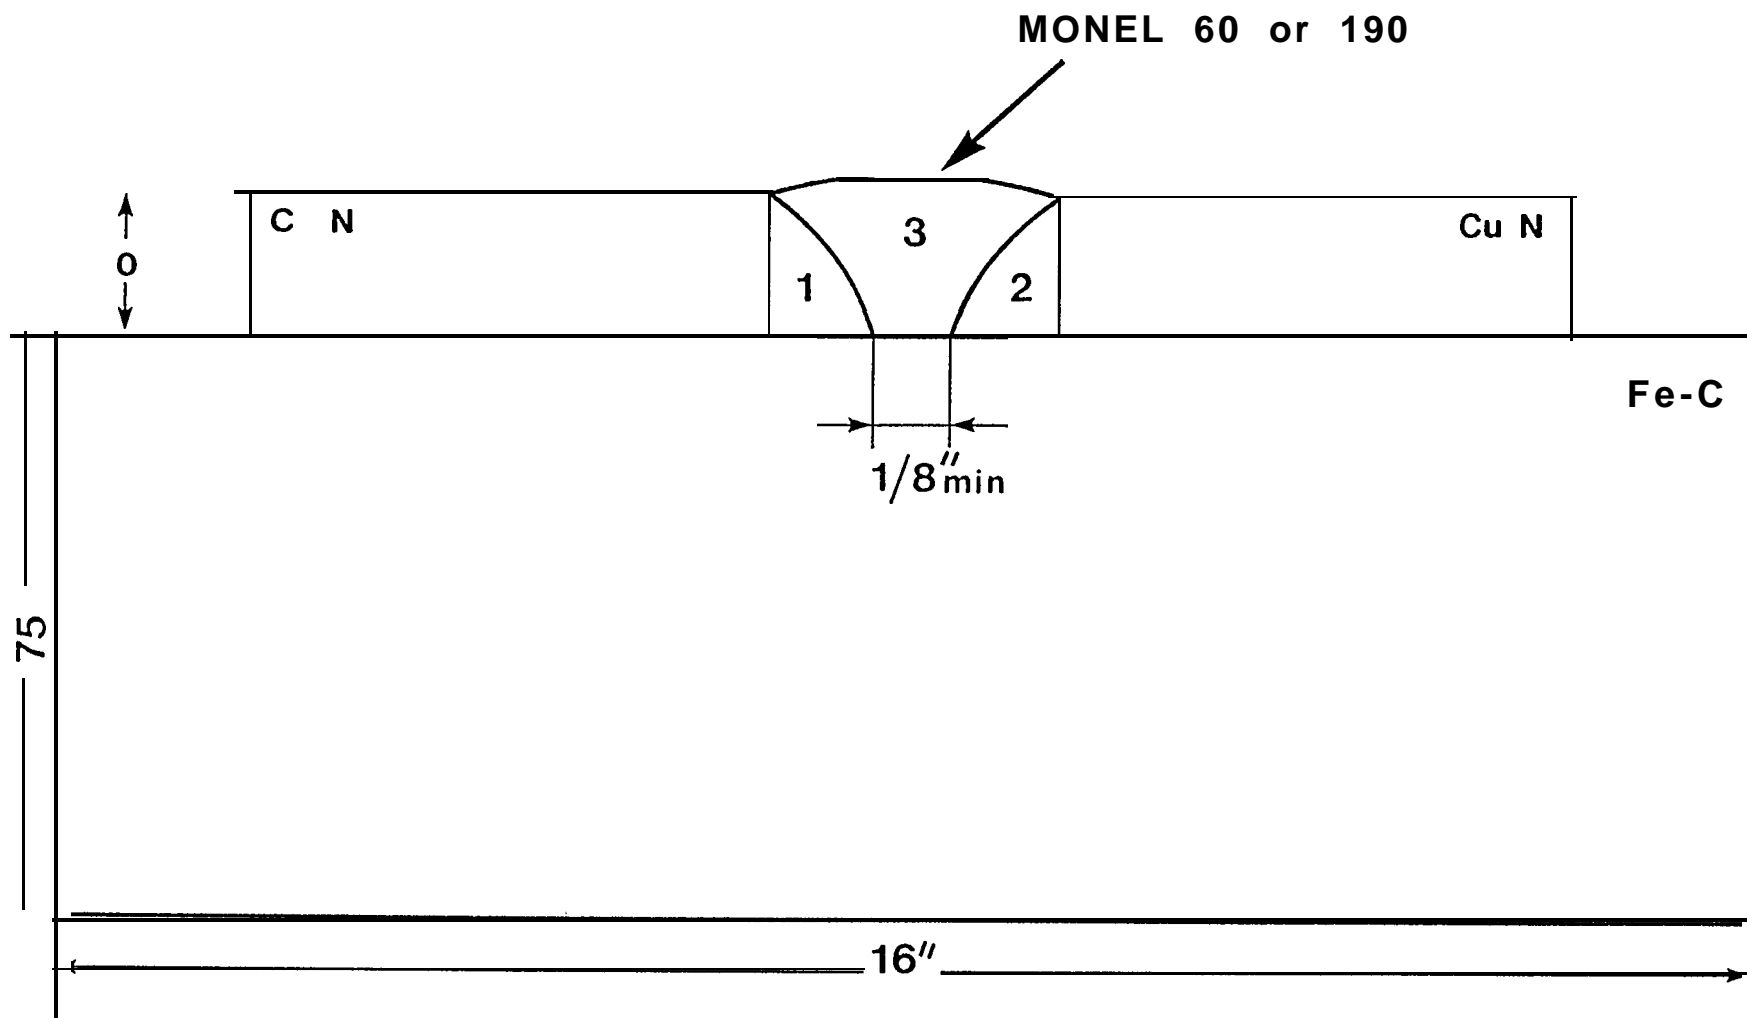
"Fillet welds and fill-in pass" methodology for welding Cu/Ni sheaths to the underlying steel hull plate.
